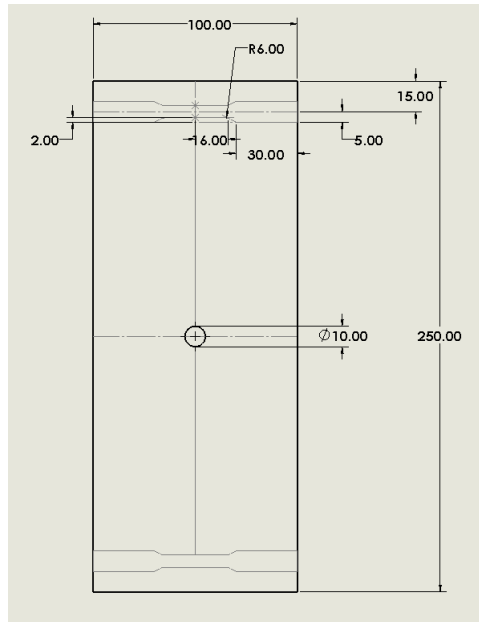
SolidWorks drawing of tool path used in wire EDM for 10 mm hole diameter (5 mm notch radius) plate of sheared-edge specimens.
